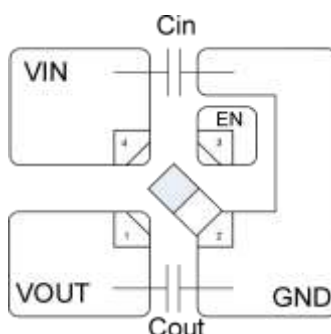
(A), Recommended PCB Layout of OCP2820VxxAD
